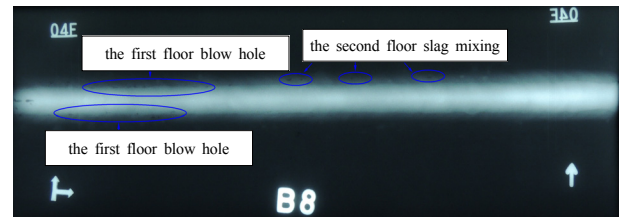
X-ray Radiographic test film of welding specimen to 4pass at CO₂ 20% +Ar 80% in 15 L/min
